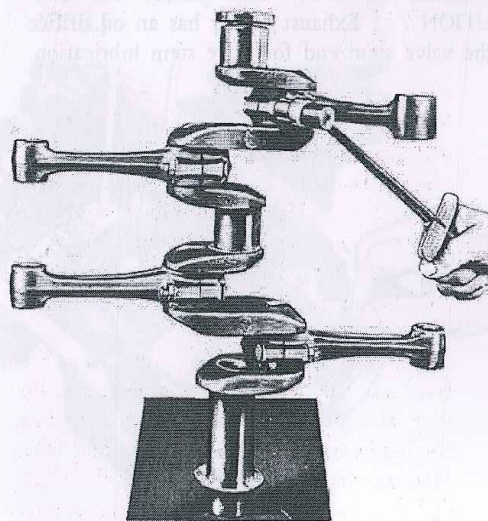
Tightening No. 1 Connecting Rod Bolts.
